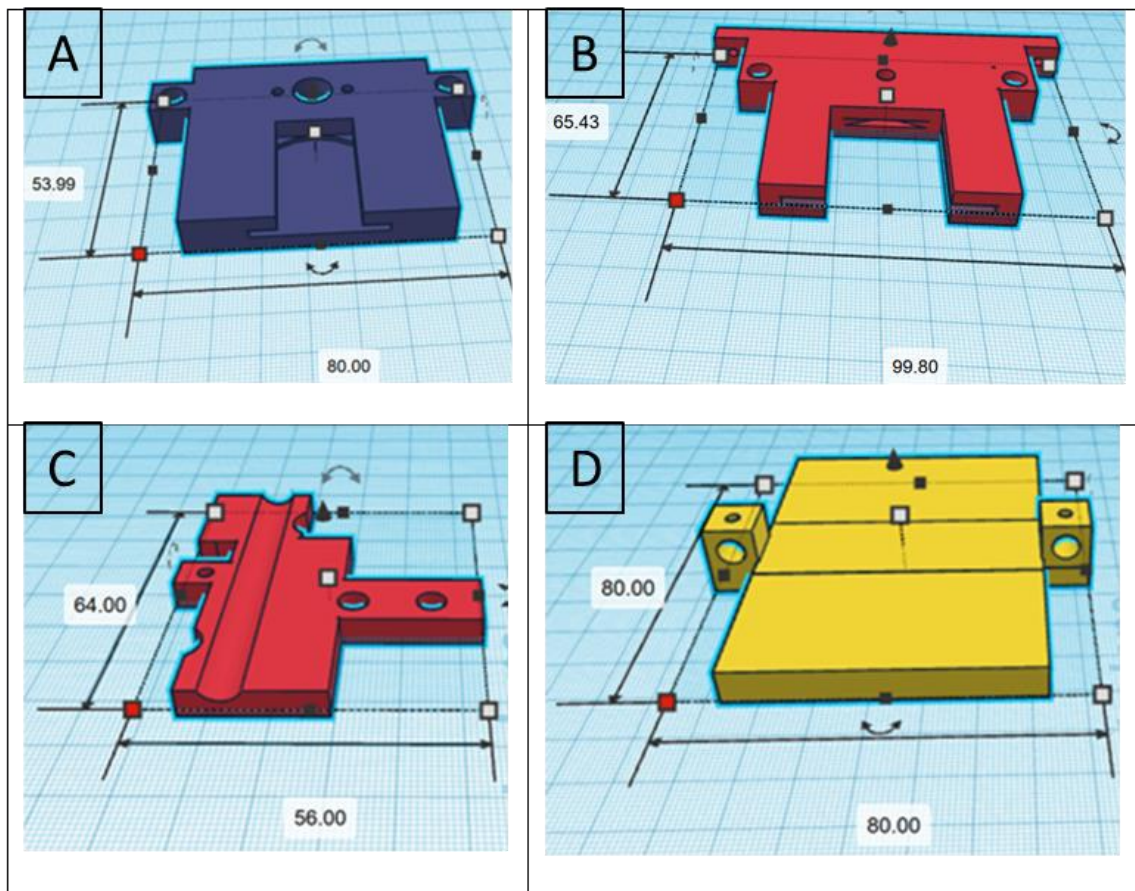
Technical drawings of the syringe holders (A) and (B) on top of the printer, the nozzle holder (C) for the brass pipe and the mounting (D) that was used to hold the stainless steel bars on top of the printer.
